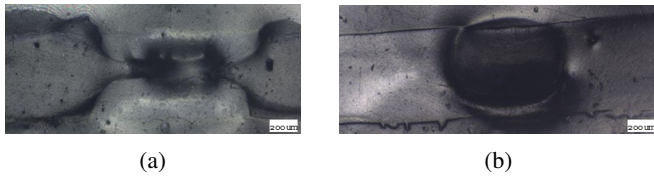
Weld morphology showing (a) areas of non-welded regions, and (b) areas with damaged weld sections.
